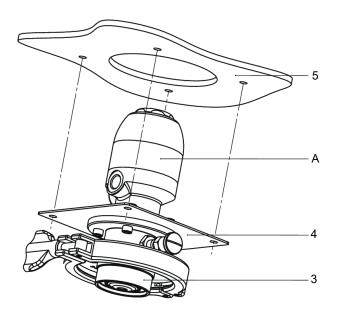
Assembling the pneumatic stainless steel actuator in the housing
